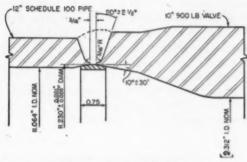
Detail of pipe-to-valve welded joint for 10-in, 900-lb valve to 12-in. Schedule 100 pipe
